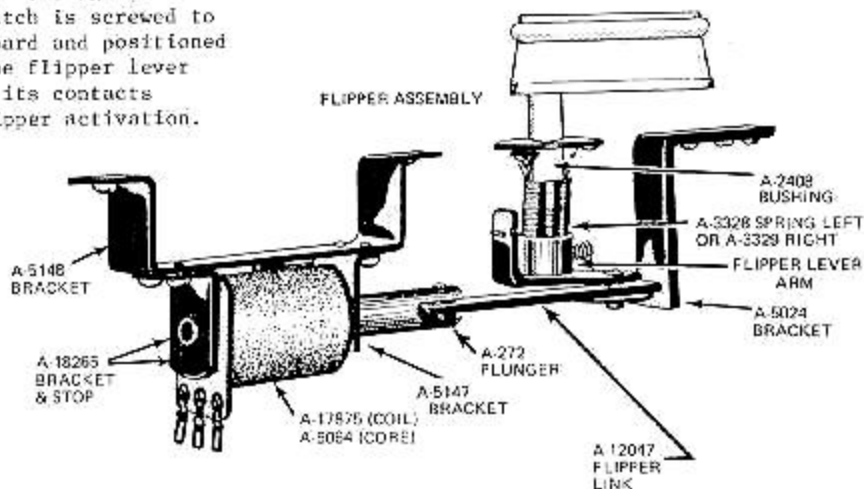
FIGURE III. ALTERNATE FLIPPER ASSEMBLY
